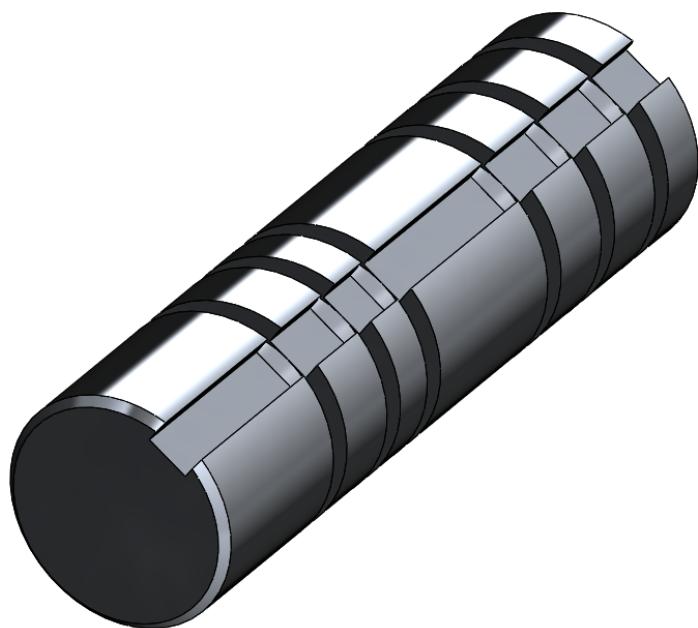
Hirani, Asimm: Gearbox Drive Shaft
